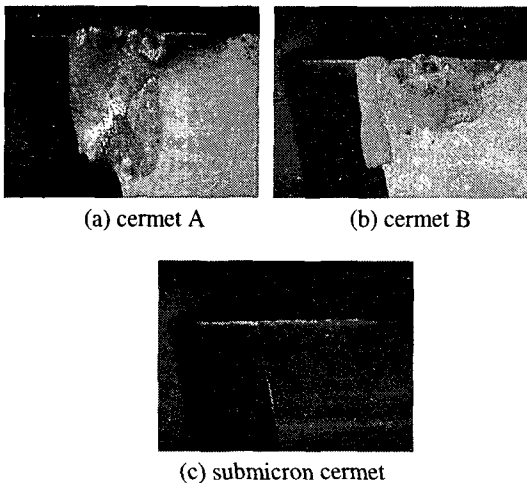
Photographs of various cermet tool after interrupt test in up-milling of SCM4
